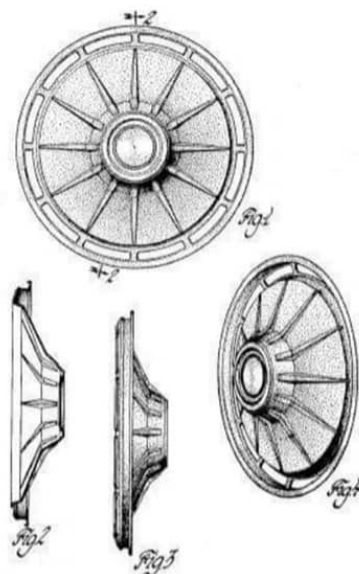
is a front elevational view of a wheel cover showing my new design;
